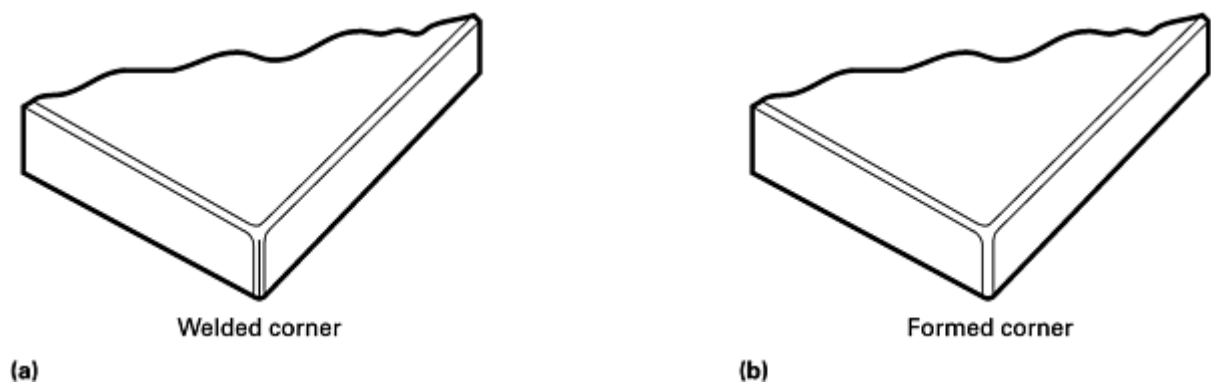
Flange forming. (a) Flanges can be formed from blanks with notched corners, but they must be welded in the corner for strength, shape retention, and chip resistance. (b) Flanges can be formed with drawn shapes. Here, no welding is required.
